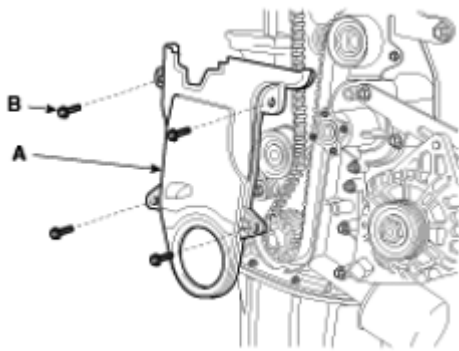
Locating Timing Belt Lower Cover And Bolts
